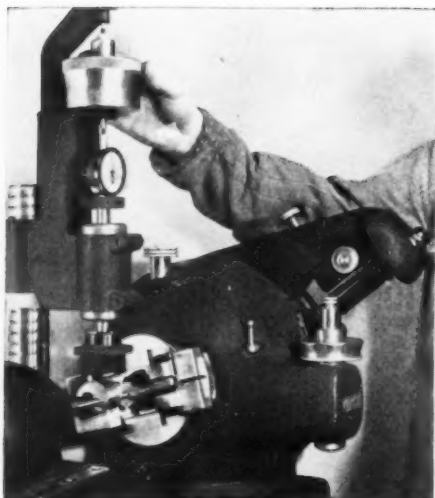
The optical master inspection dividing head together with the cam gage or comparator, designed for use in connection with it. The hand of the operator is moving the micrometer, which is mounted in between two dial indicators, only the extreme lower rim of the upper indicator being visible.
